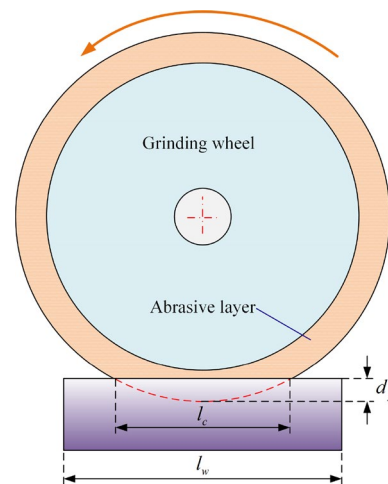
Diagram of contact state between grinding wheel and workpiece
